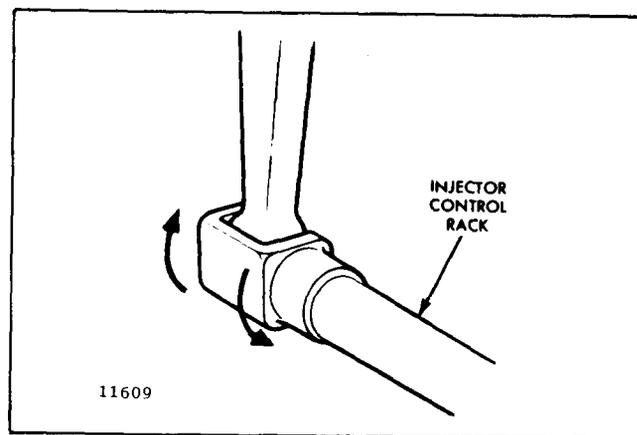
Checking Rotating Movement of Injector Control Rack
